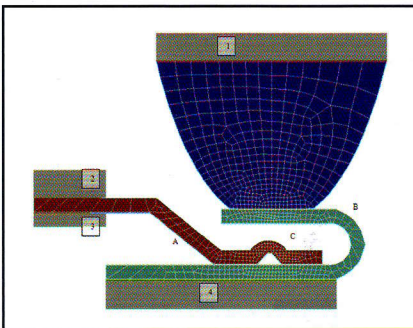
An indirect hem projection weld. Objects 1-4 are machine tools. A, B, and C are work pieces; hem-inner, hem-outer, and hem-projection, respectively.
